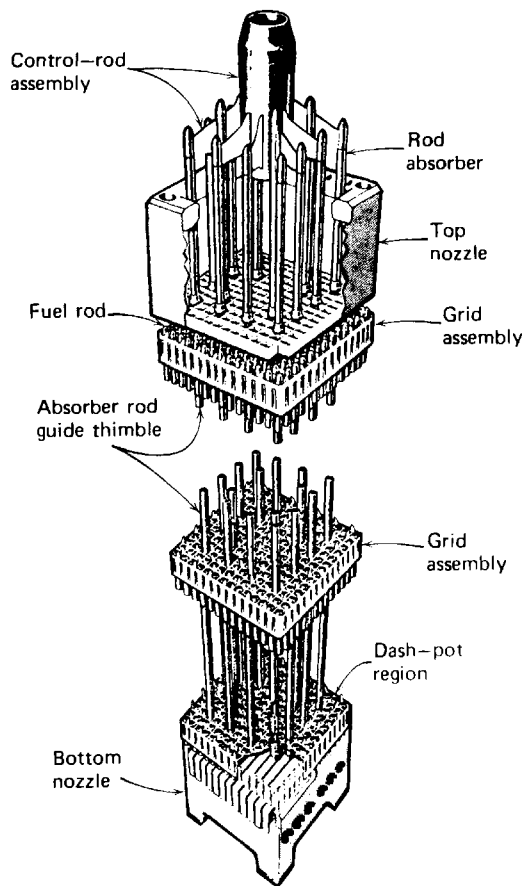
PWR rod cluster control assembly.¹⁶
